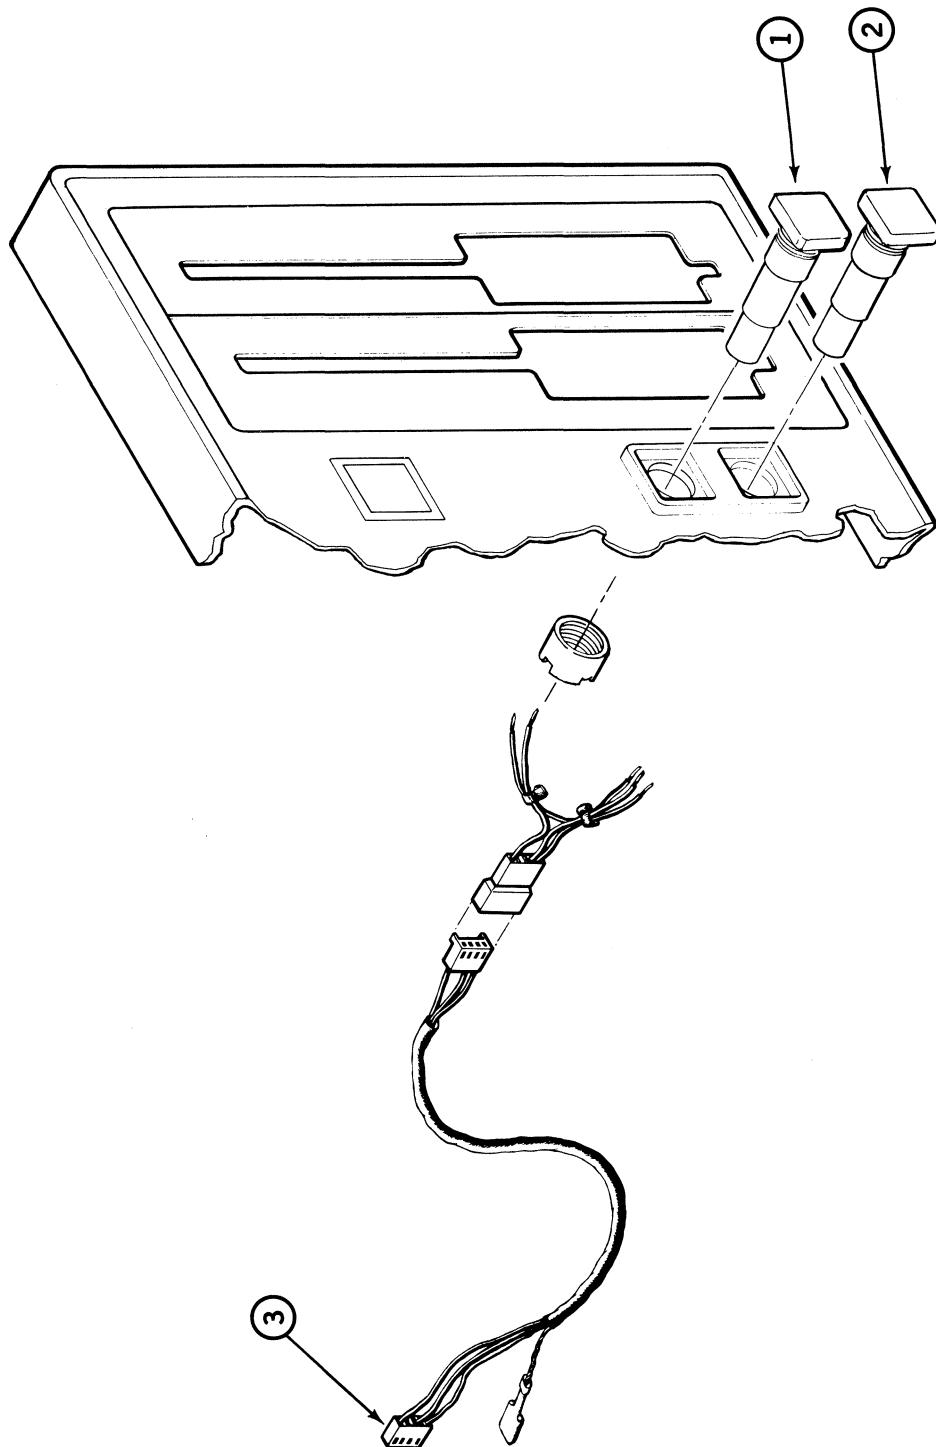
Exploded View, Reset/Power On Indicator Module
